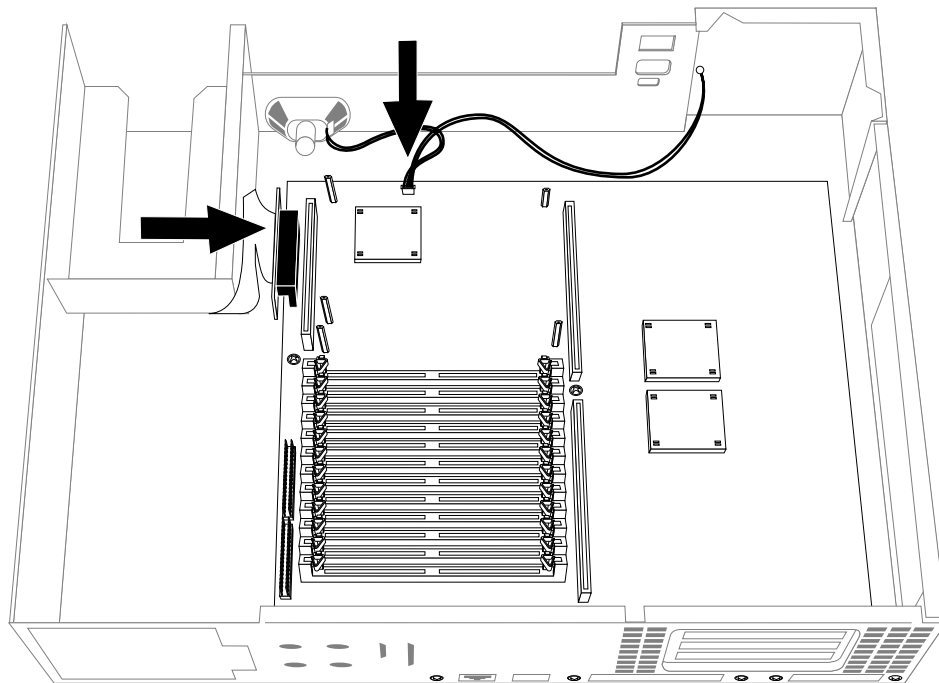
Reconnecting Cables to the IP26 System Base Board
